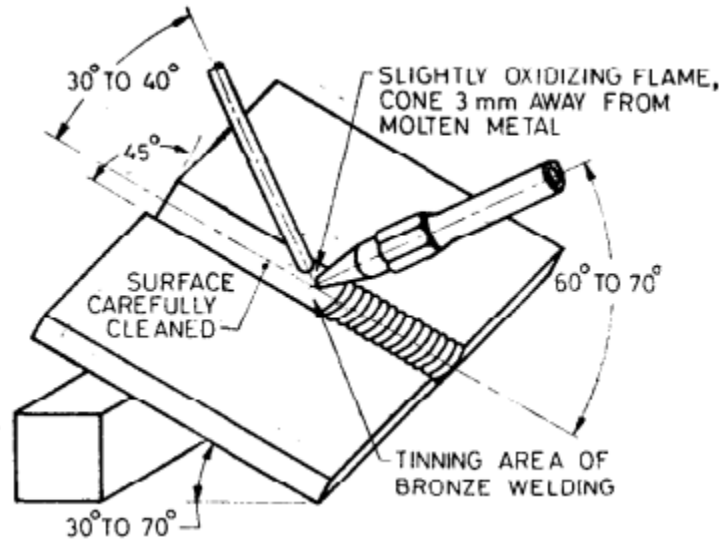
ANGLES OF RODS AND BLOWPIPE FOR BRONZE WELDING
